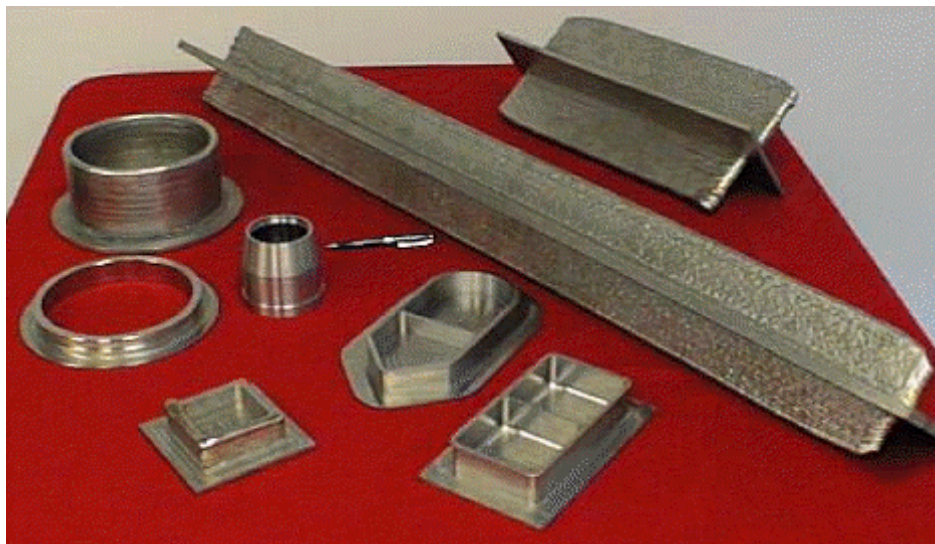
Parts manufactured with Ti alloys using the Lasform
